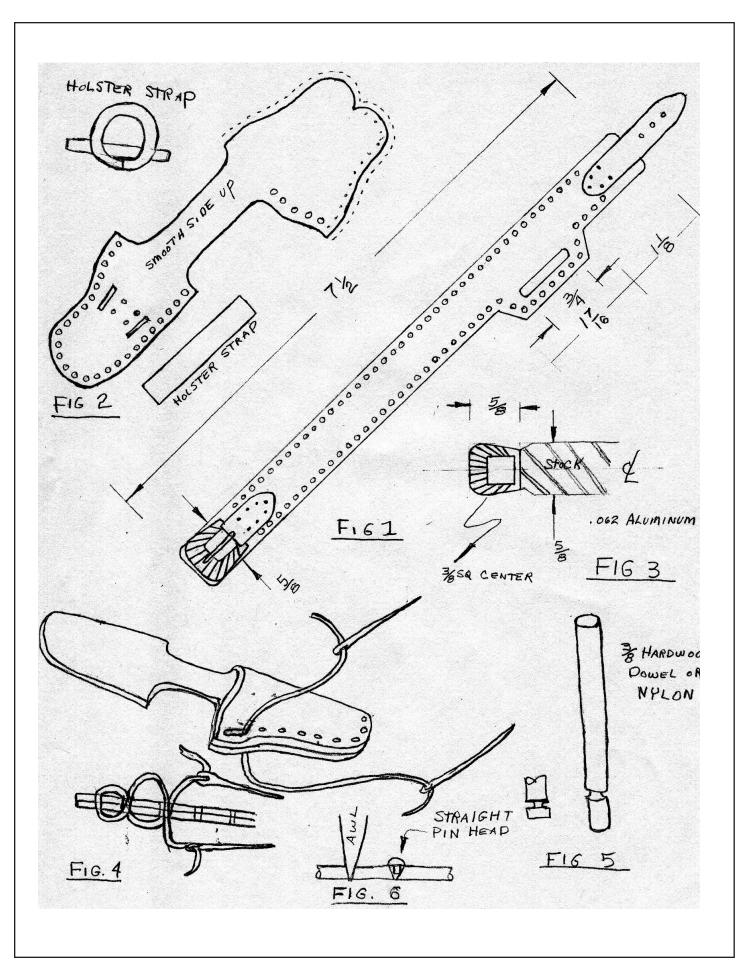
Lay out the sunburst from the center of the back of the buckle. You can use a black marking pen for your layout ink. Use a chisel and strike just hard enough to leave a nice groove. Finish rounding the edges of the buckle and polish down to 600 wet & dry paper. Polish the buckle on the buffing wheel, then cut the buckle from the stock. This procedure gives you something to hold on to while doing all this work. When you finish polishing make the buckle catch from .025 to .035 wire. Then finally sew the buckle & tongue to the belt.
